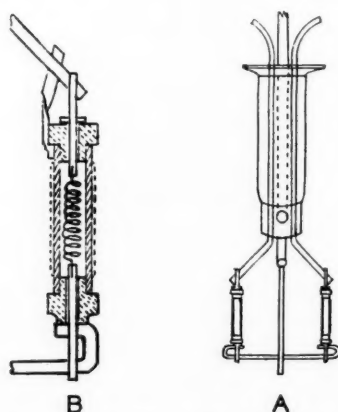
The indirectly heated electrode (B) and the assembled mount for the G-1 lamp (A)
